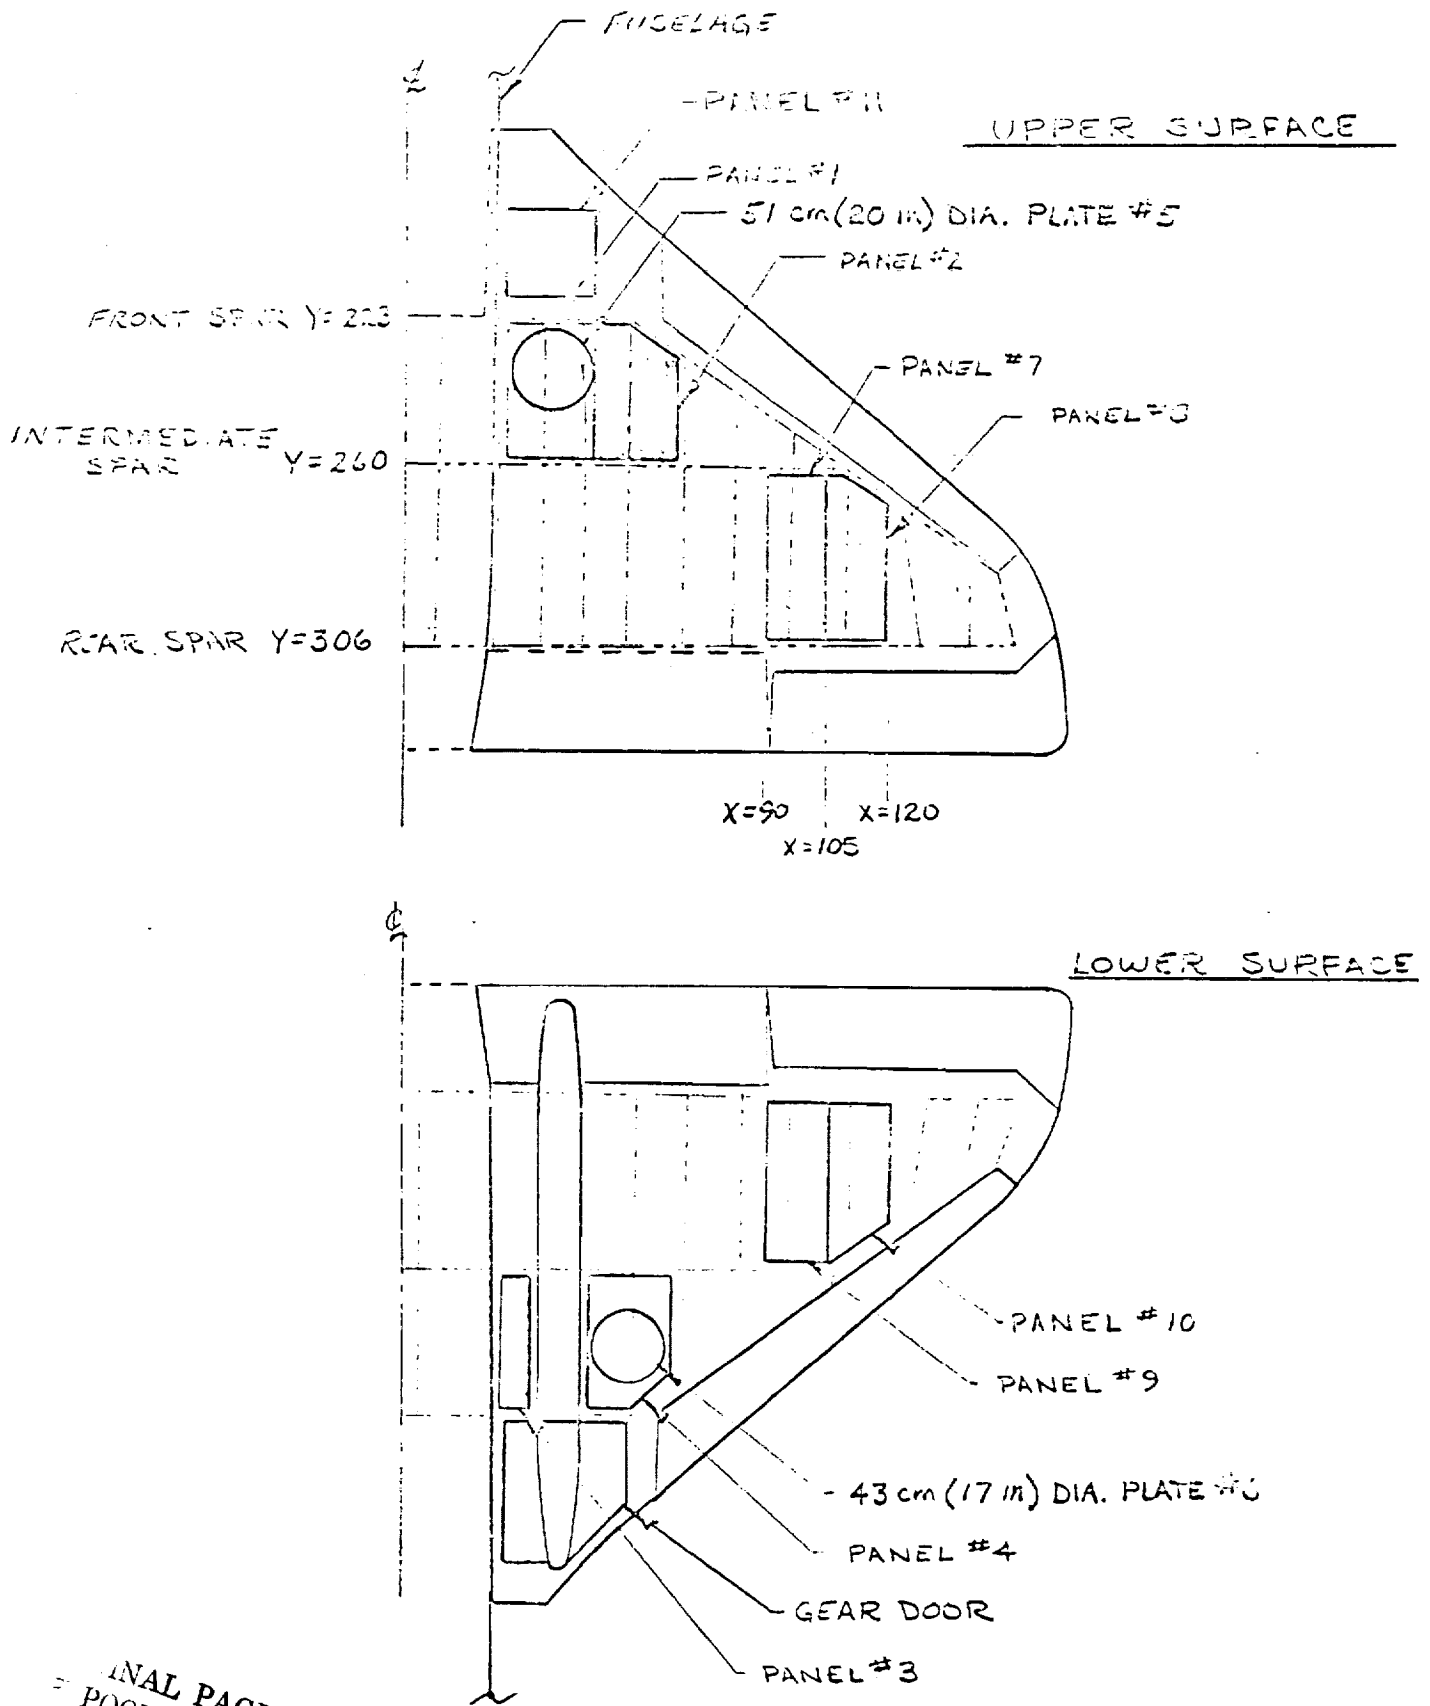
HOLE CONFIGURATION #5. PANEL 2 AND PLATE 6 REMOVED
